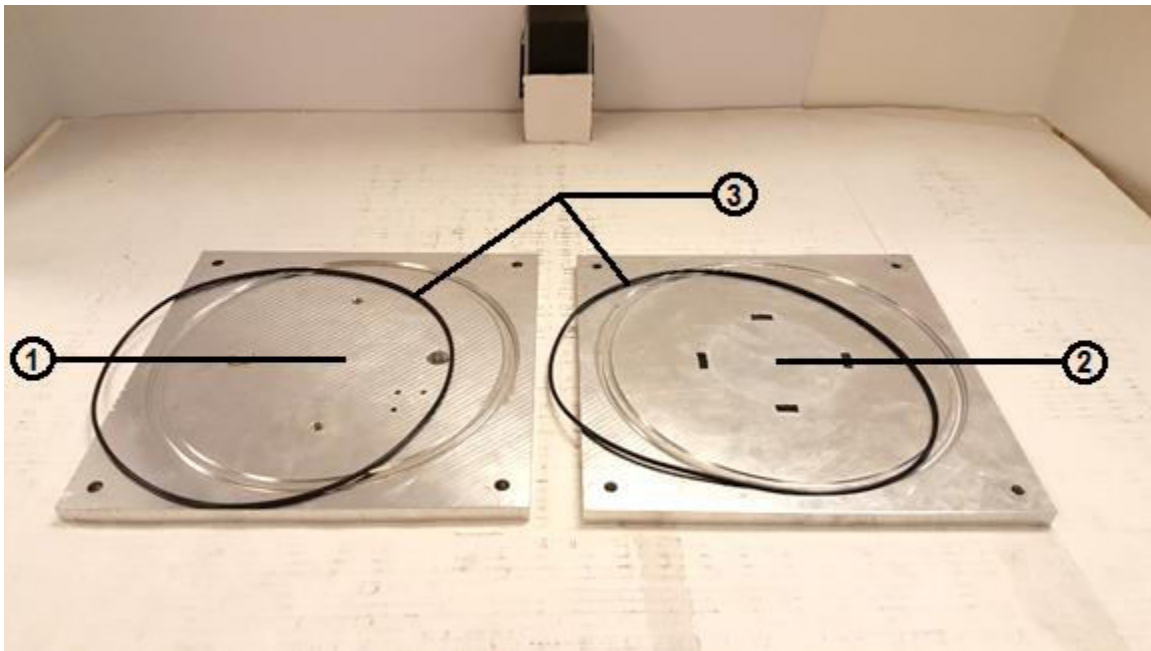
1) Aluminum top plate, 2) aluminum base plate, 3) 2 rubber O-rings
